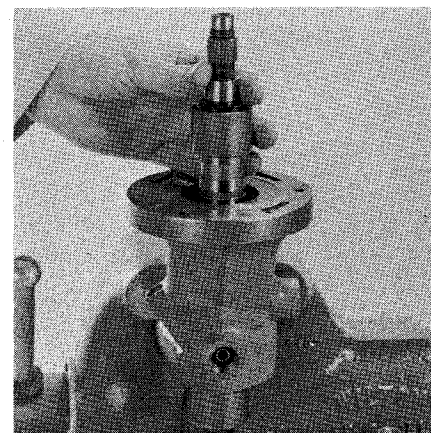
Removing the actuator shaft assembly from housing. Be careful not to cock control valve spool in bore of housing.
